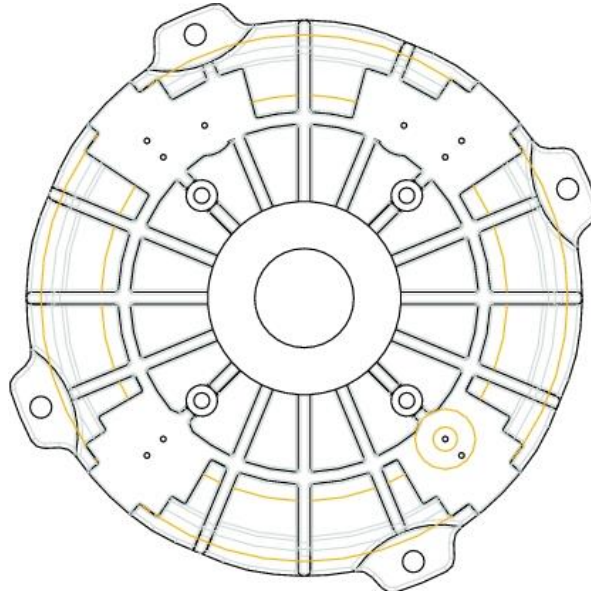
Standard flange for V-belt, cardan and clutch drives
